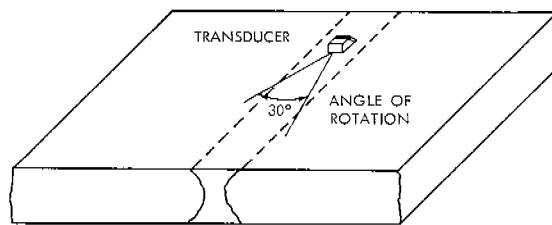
SUPPLEMENTARY TECHNIQUE FOR INSPECTING BUTT WELDS WHEN THE WELD BEAD IS GROUND FLUSH
